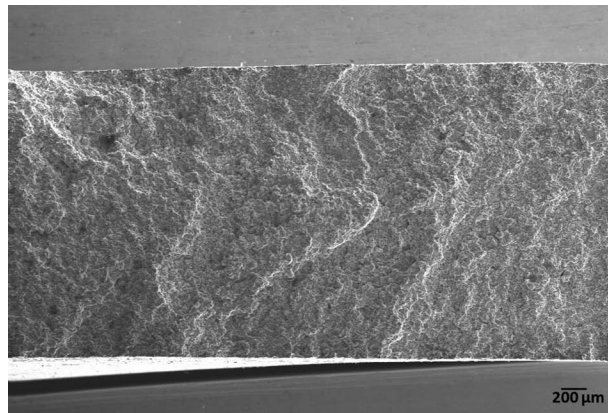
Fracture surface of a tensile-tested dissimilar AA 2219-AA 5083 TIG weld joint tested at 77 K. The specimen failed at the fusion boundary of AA 5083 side
